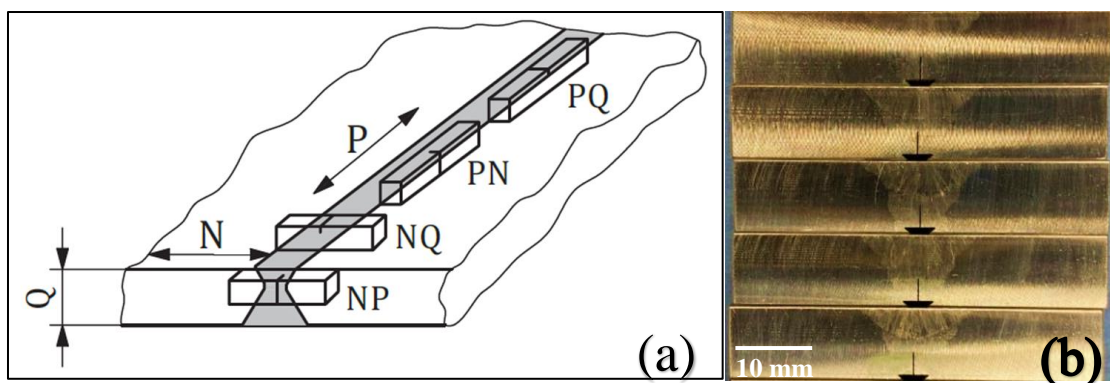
(a) Possible orientations of Charpy-type fracture toughness specimens extracted from welded plates [20], and (b) photograph of some as-received specimens, showing the location of the weld. The specimens tested in this study correspond to orientation "NQ", where the first letter (N) is the direction normal to the crack plane, and the second (Q) is the expected direction of crack propagation (N = normal to weld direction; Q = weld thickness direction), such that the notch faces the root of the weld and crack propagation moves towards the weld cap.
